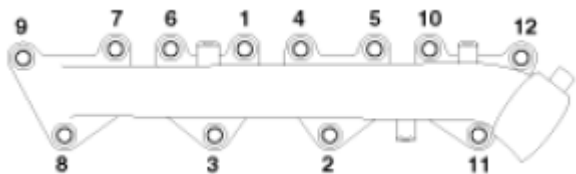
Identifying Exhaust Manifold Nuts Tightening Sequence (LH)- With Engine Assembly Removal
